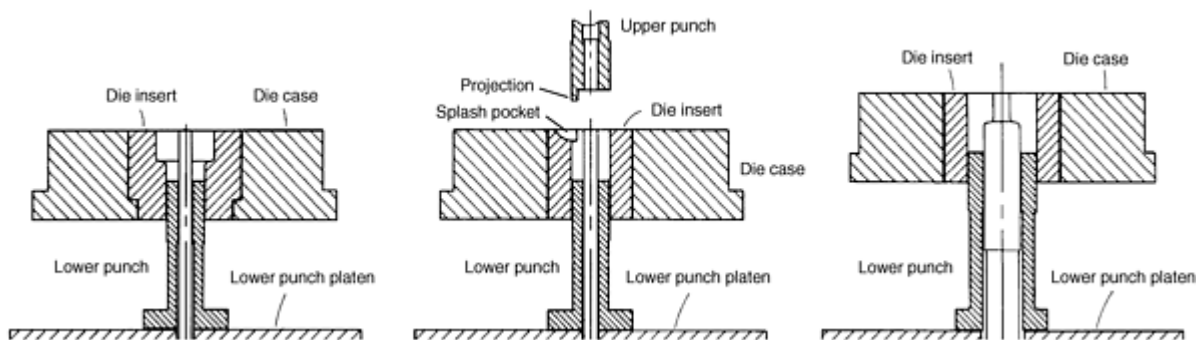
Methods of achieving fixed fill levels. (a) Fixed fill on an upper level using a step die. (b) Fixed fill using a splash pocket to permit a projection feature on an upper punch. (c) Stepped core rod forming an internal shoulder
